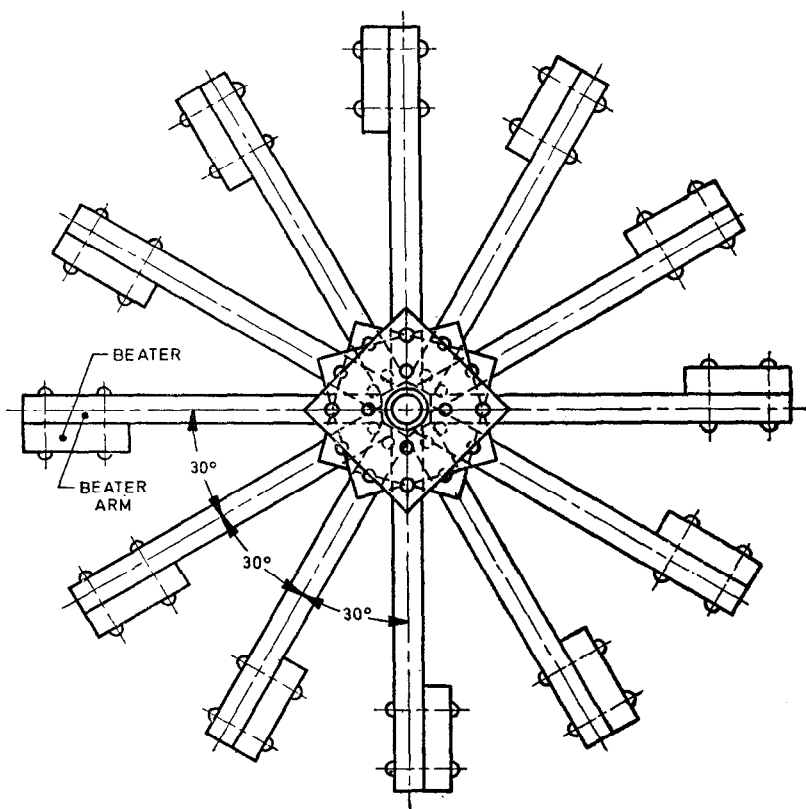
ASSEMBLY OF BEATER BAR WITH 12 BEATERS
